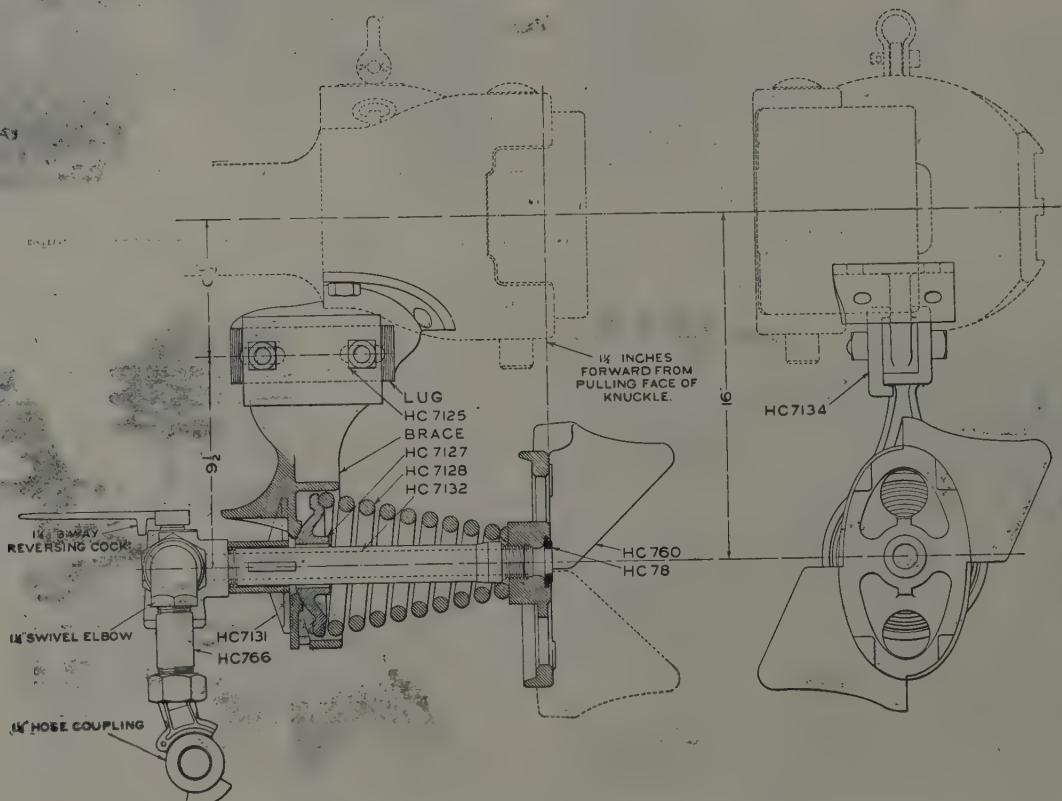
Freight Connector for Air Brake Pipes. New York Air Brake Company.
